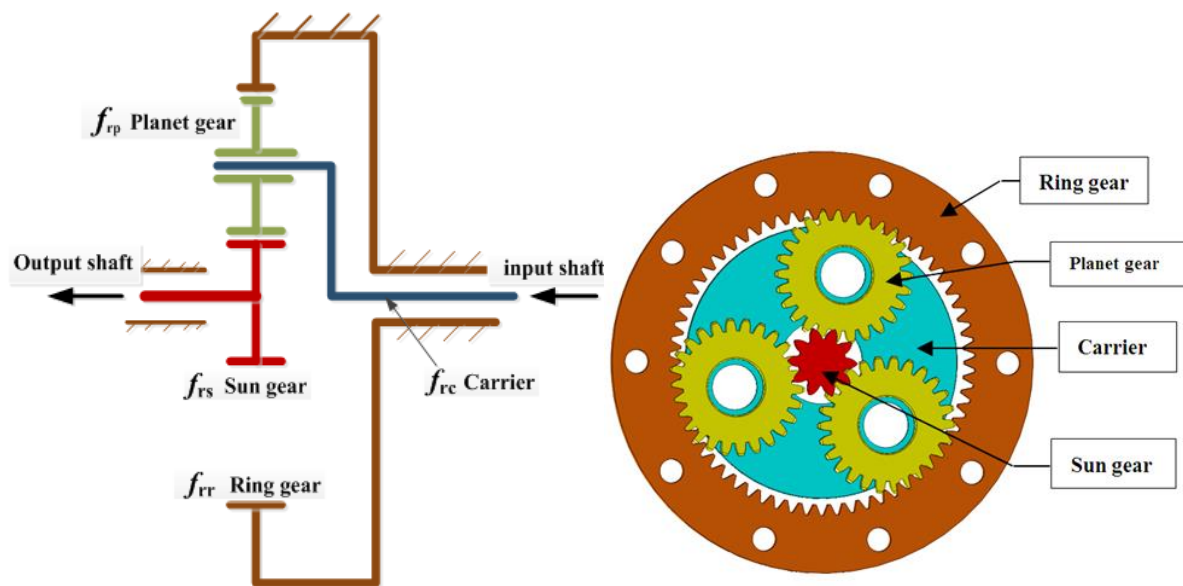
Schematic of a planetary gearbox with the standstill ring gear
